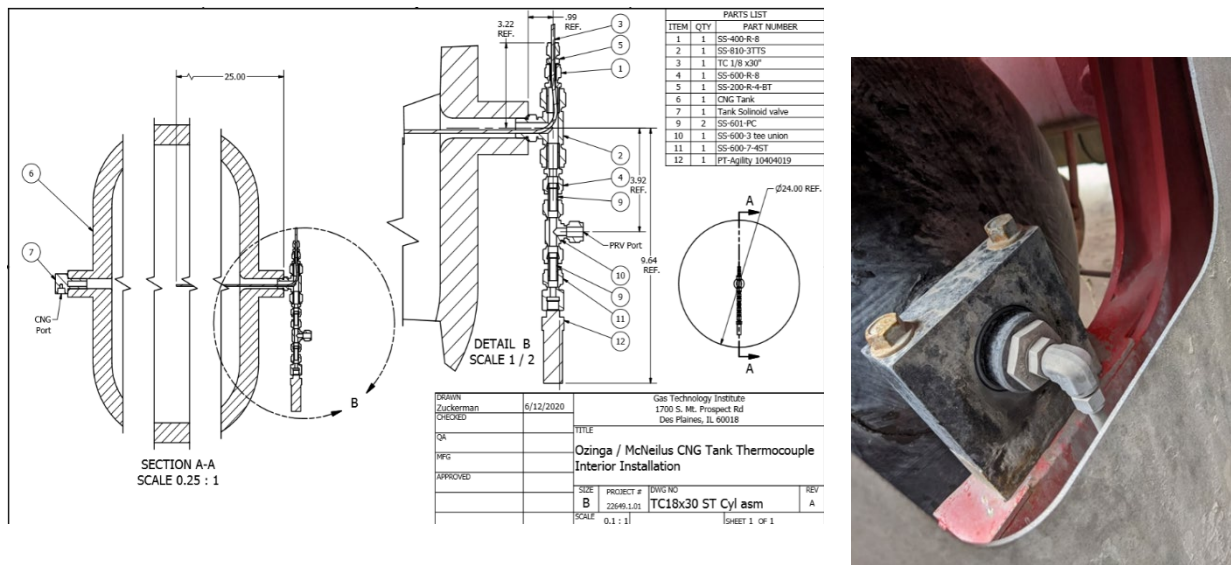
Diagram of pressure and temperature probe mount (left) and photo of mounting location on tank (right)
